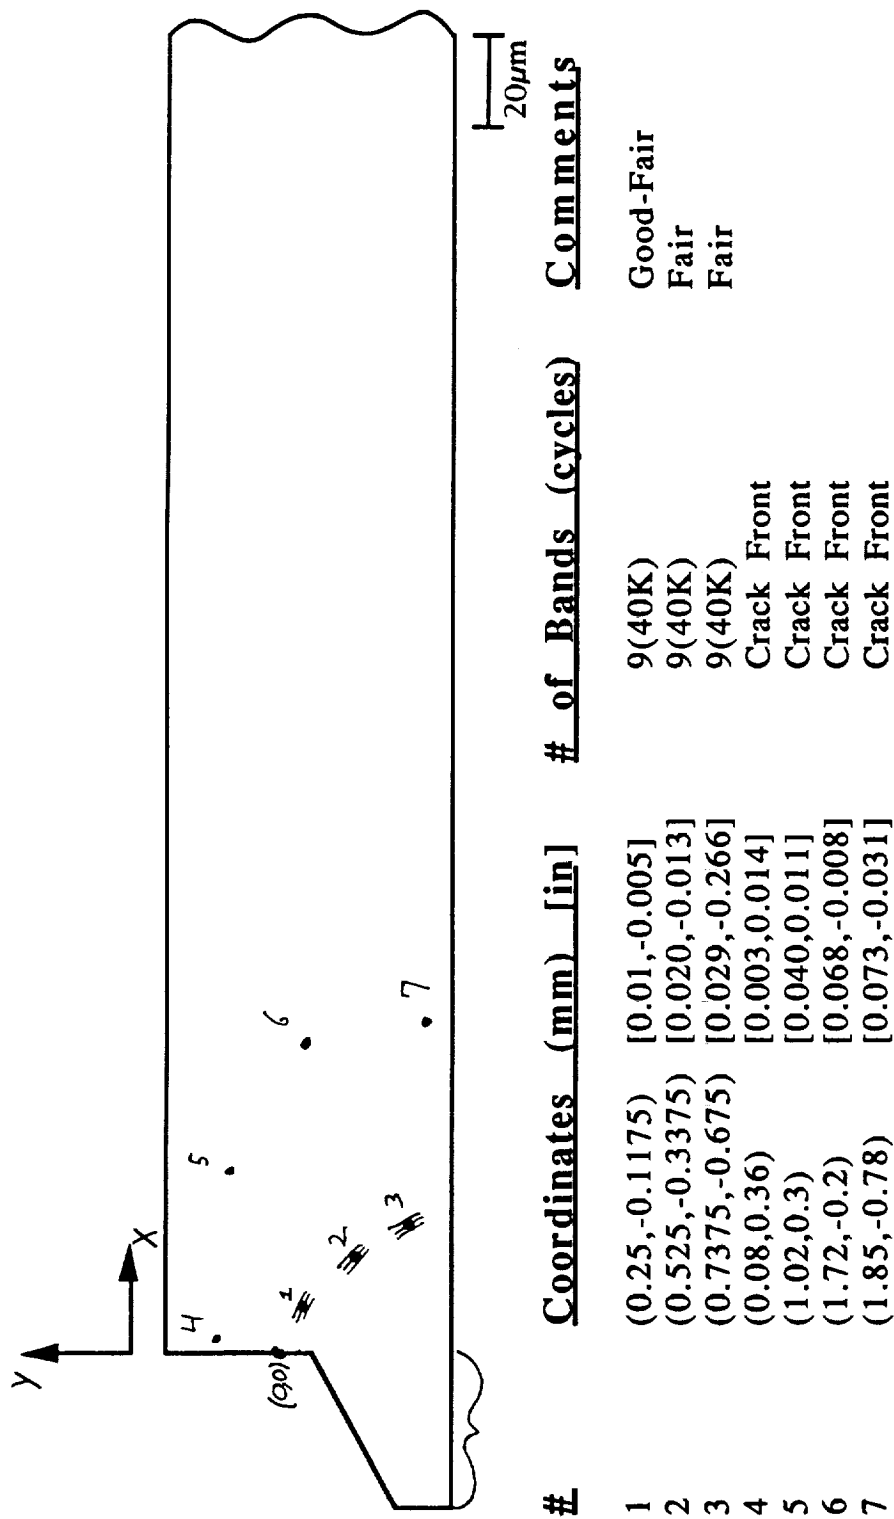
Rivet hole schematic: Upper rivet row, hole number 3J13, fatigue crack growth is in the forward direction.
